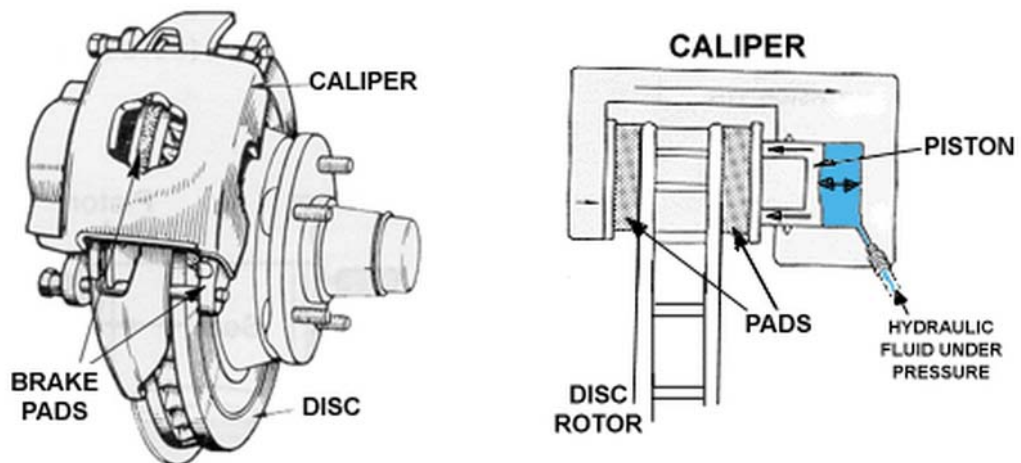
Brake disc assembly and floating calliper schematic representation.
